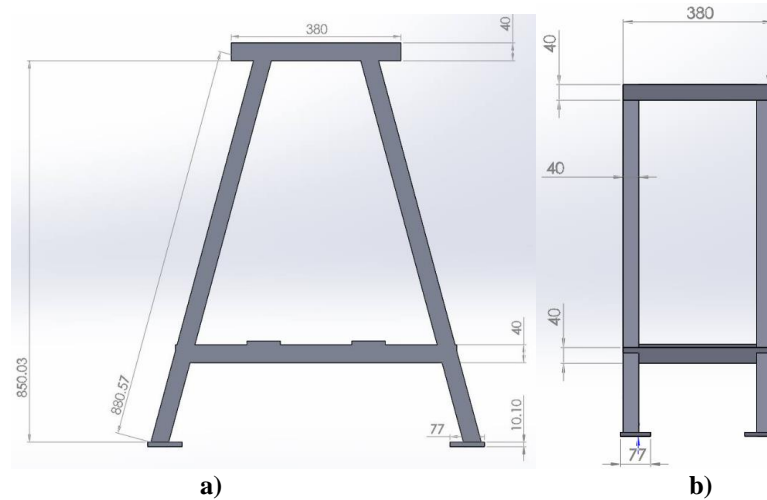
Old base dimensions (values in mm): (a) Front view; (b) Side view.
